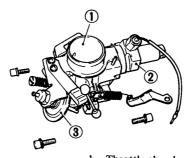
Removing E.G.R. control valve and B.P.T. valve
